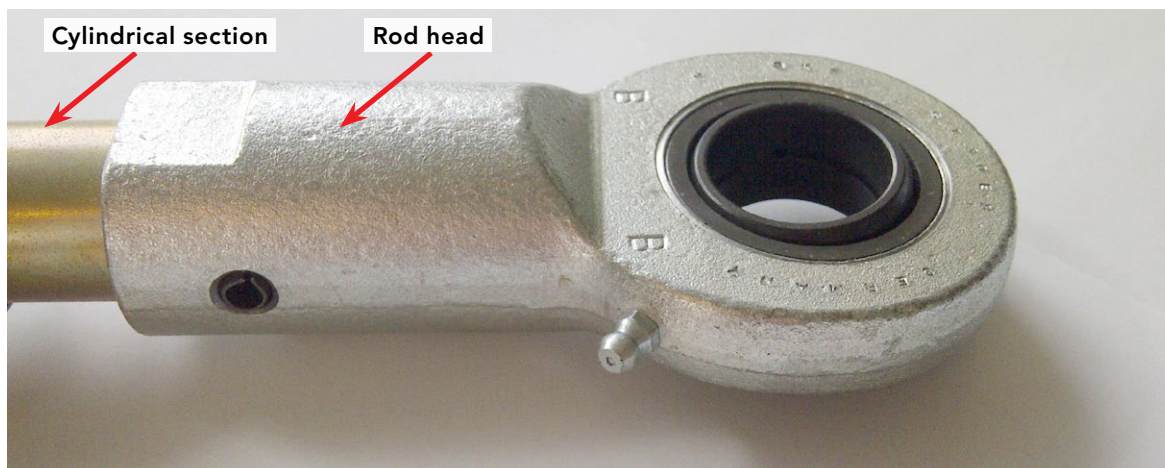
This photograph shows the original design of the rod head whereby the rod head was attached to the cylindrical section with a threaded connection. (Source: ProRail)
